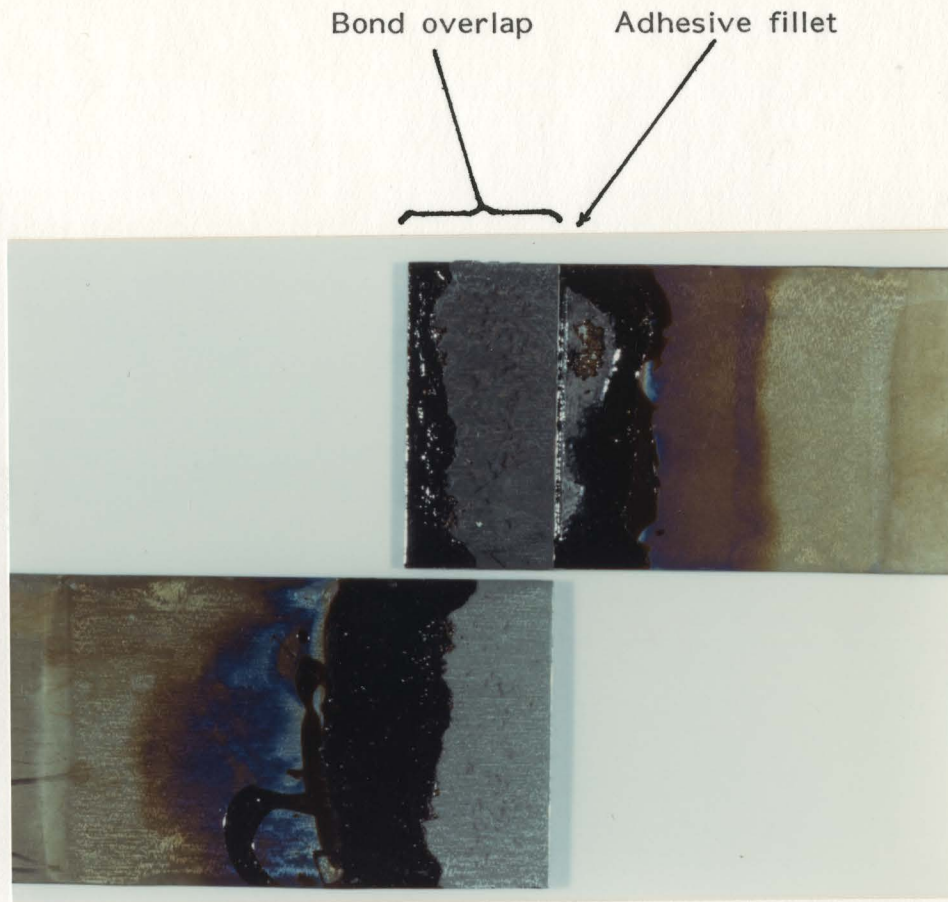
Photograph of a Fracture Surface for a Single Lap Bond Illustrating Apparent Failure V.
